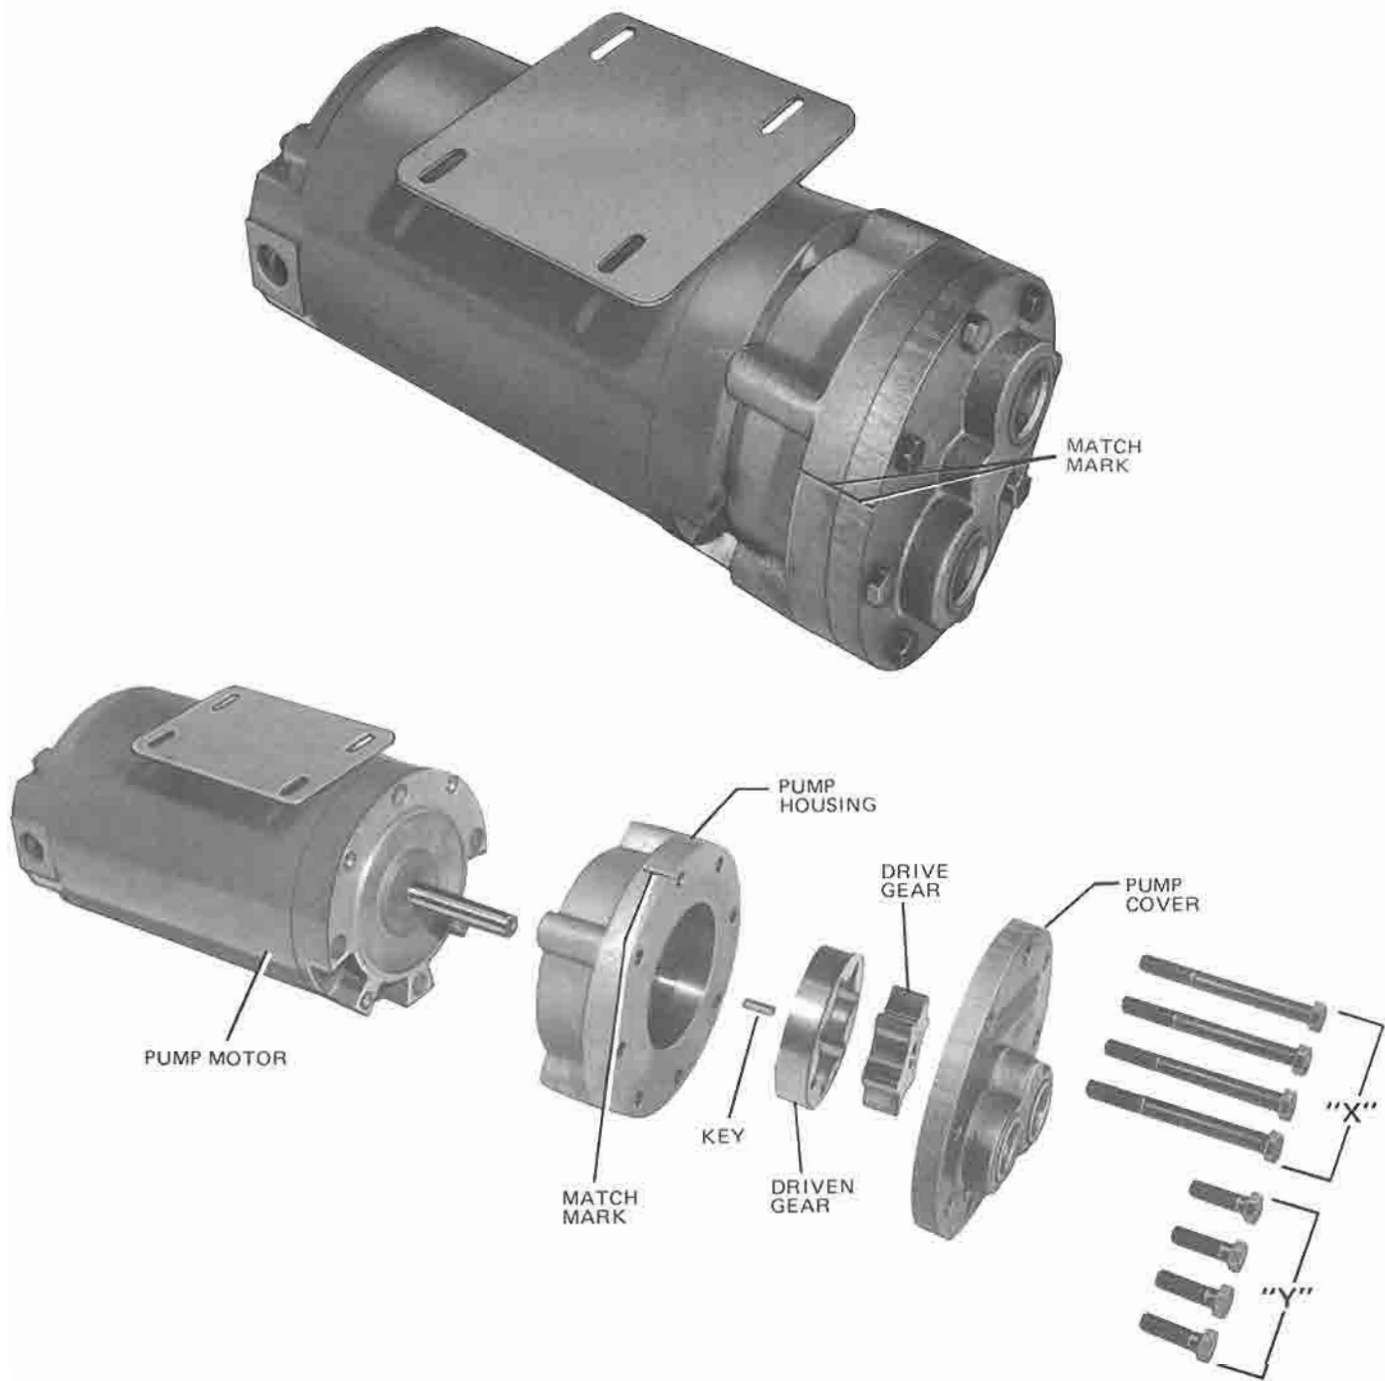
COMPLETE PUMP AND MOTOR ASSEMBLY
